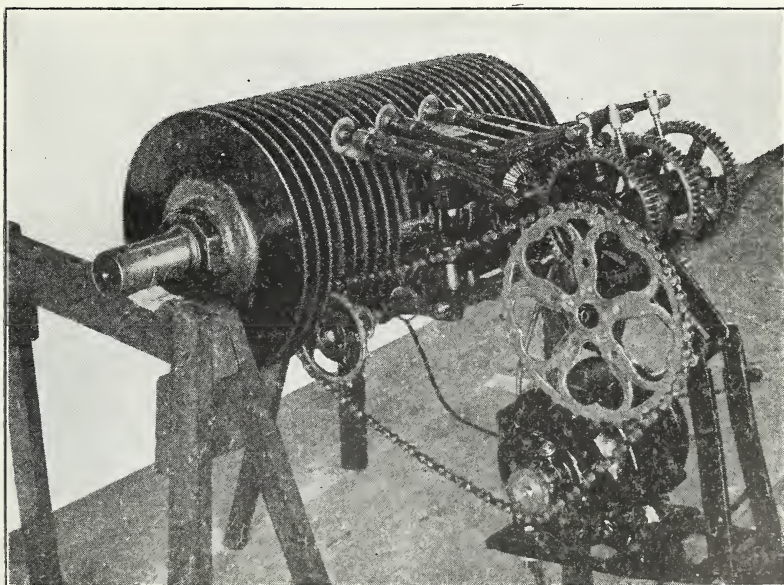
A portable triplex, motor-driven filing-gumming machine having rotary gummers and rotary side files; also made for using angular side files.
